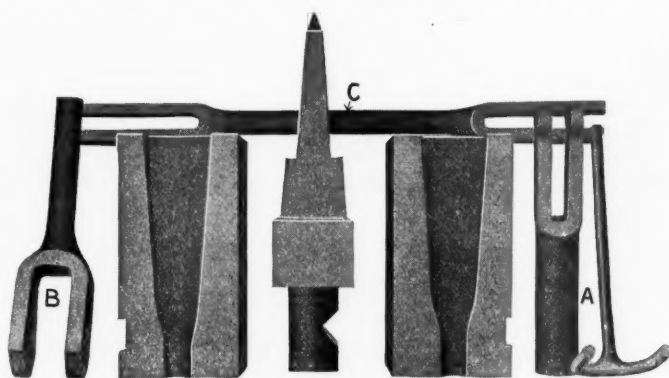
Typical Dies and Former for Butt-Welding, With Examples of Such Work.
